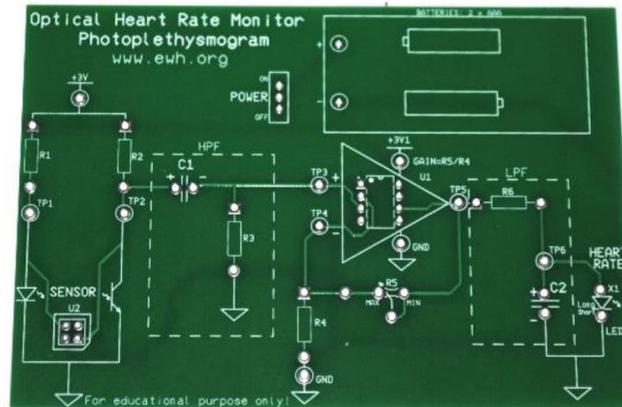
Top layer of PCB. Note the silkscreen marks to assist in placement of components.
